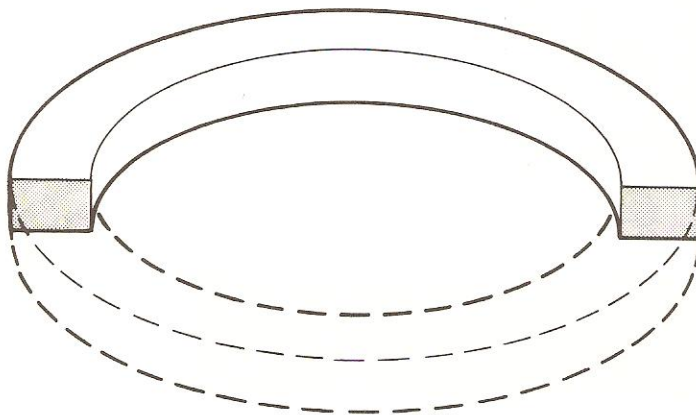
Lathe-Cut Seal is Rectangular in Section
